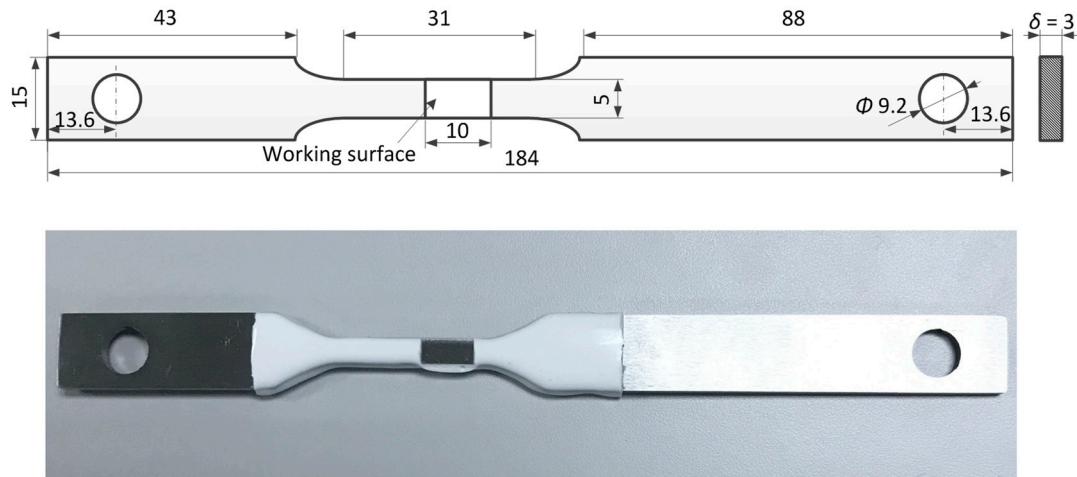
The geometry and the size of the X80 steel specimen (unit: mm).
